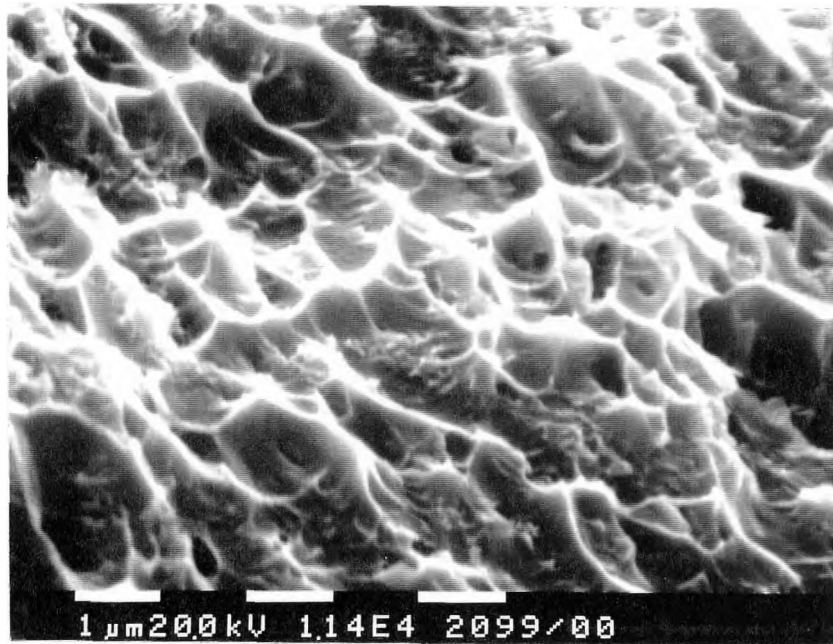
The Al-Ni Ohno cast alloy fracture surface at 11,400x magnification.
